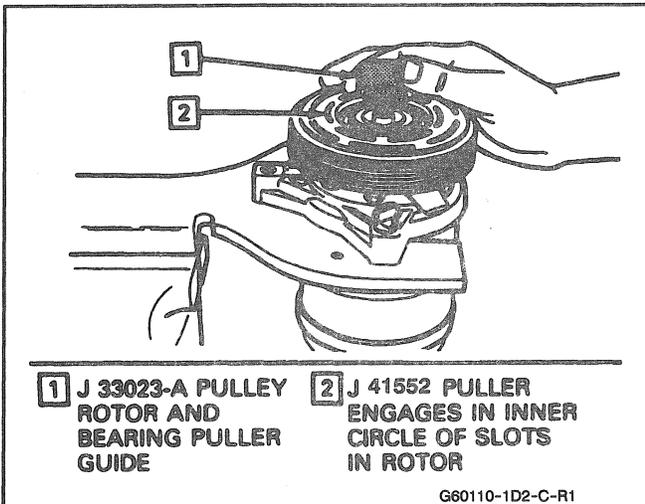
Installing Pulley Rotor/Bearing Puller Guide
